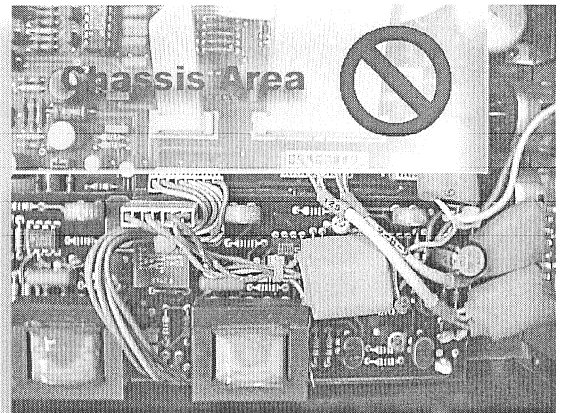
Wire placement on Main Board (no wires in "Chassis Area"!)
